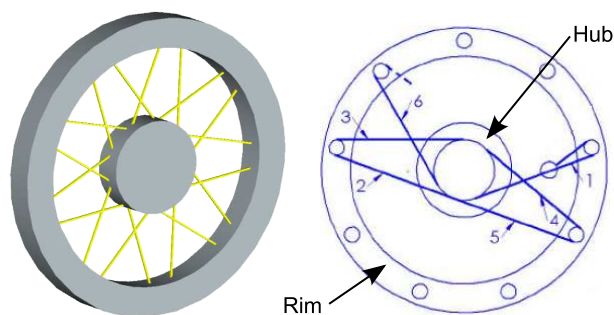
Left: Schematic of the Kevlar wheel assembly used to support the millikelvin straps. Right: diagram showing how the Kevlar is threaded to form the assembly; the thread passes round the numbered points in order.
